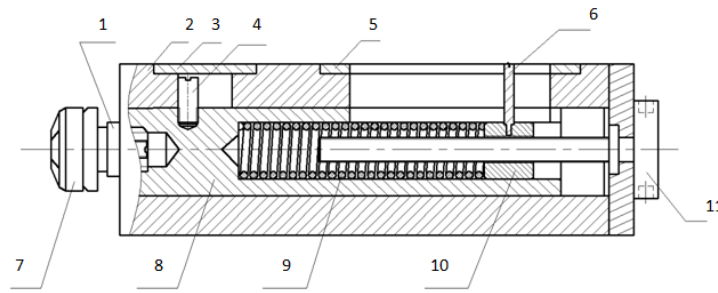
Schematic diagram of a burnishing tool: 1) lock nut, 2) body, 3) blanking plate, 4) stop pin, 5) scale plate, 6) scale slider, 7) burnishing head, 8) guide shaft, 9) compression spring, 10) retaining nut, 11) adjusting screw. Source: own study
